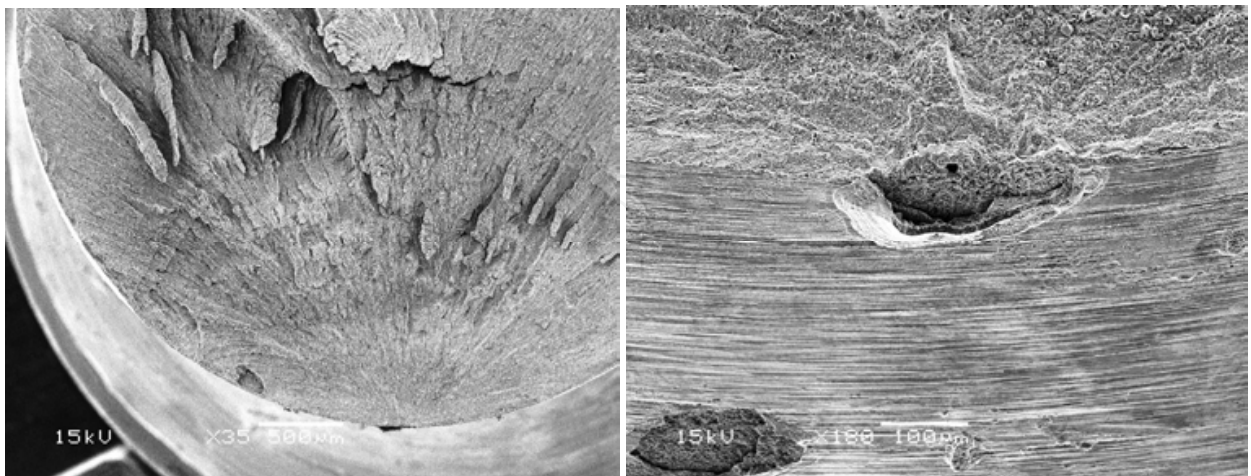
Fracture surface of the test specimen tested in water environment at 260°C (initial O₂ = 4,5 ppm, R.A. = 12,4%)
